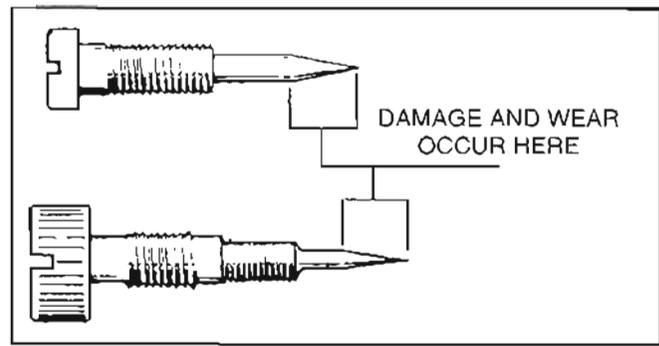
MIXTURE NEEDLE INSPECTION (PRIOR TO SPEC E, MODEL KV ONLY)
